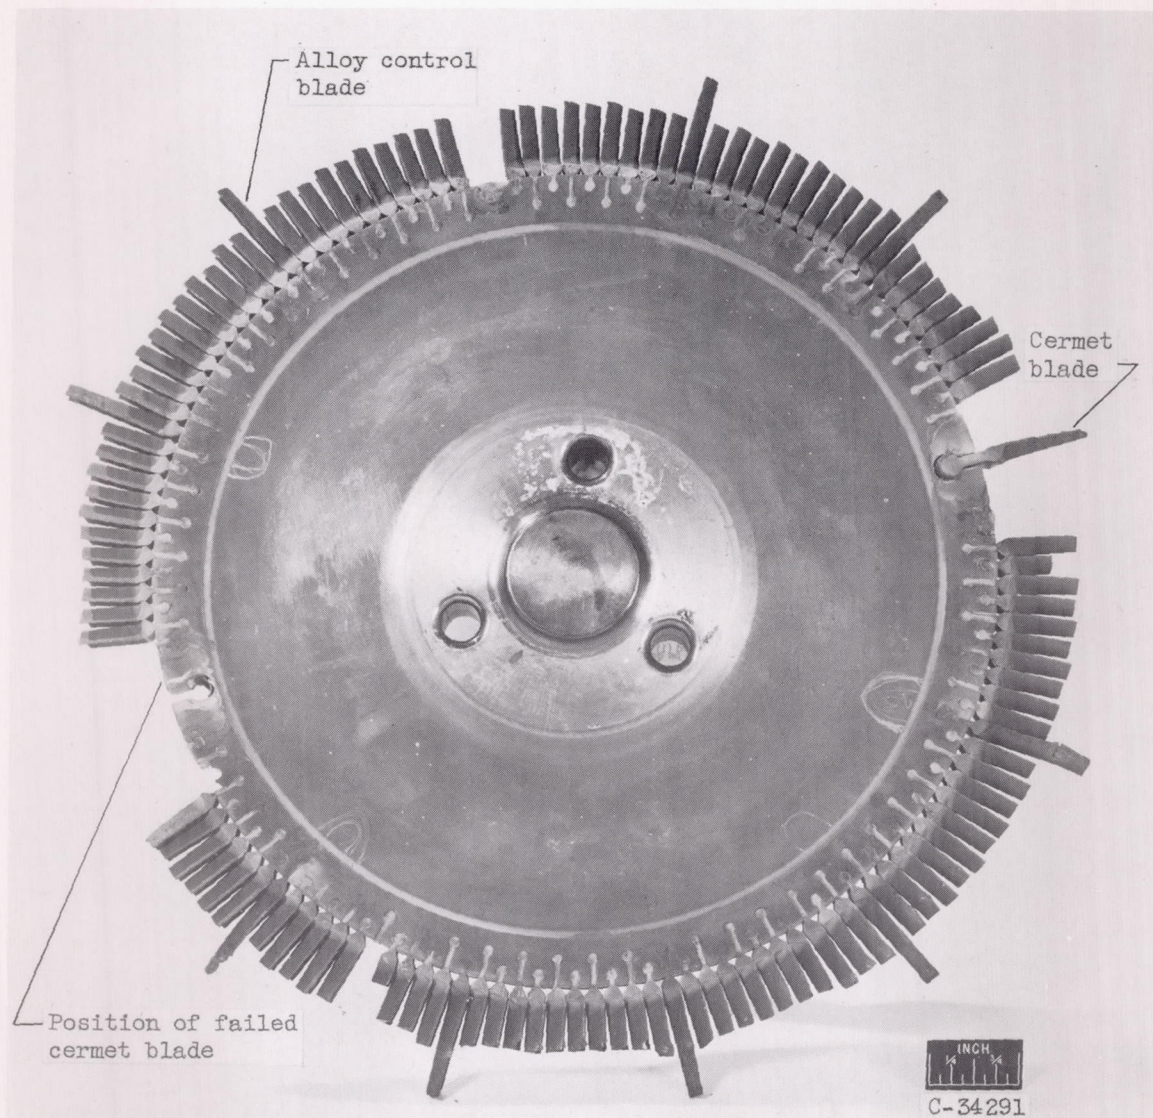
Rear view of wheel 1 after failure of cermet blade 3.
